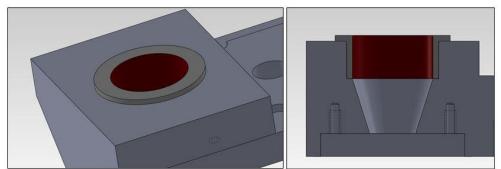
The picture to the left shows the bearing fitted in the Shoulder Holder. The picture to the right shows a cross-section view of the bearing and the Shoulder Holder
